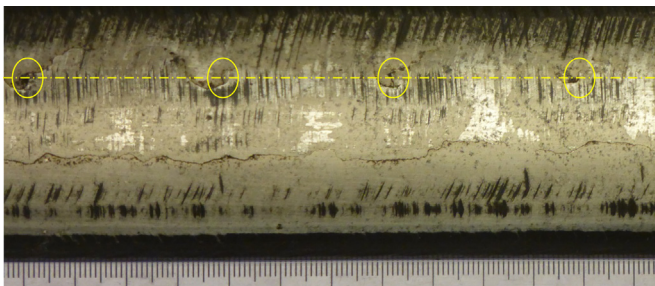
Surface crack initiation positions of the defects in Figs. 1a and 3.
